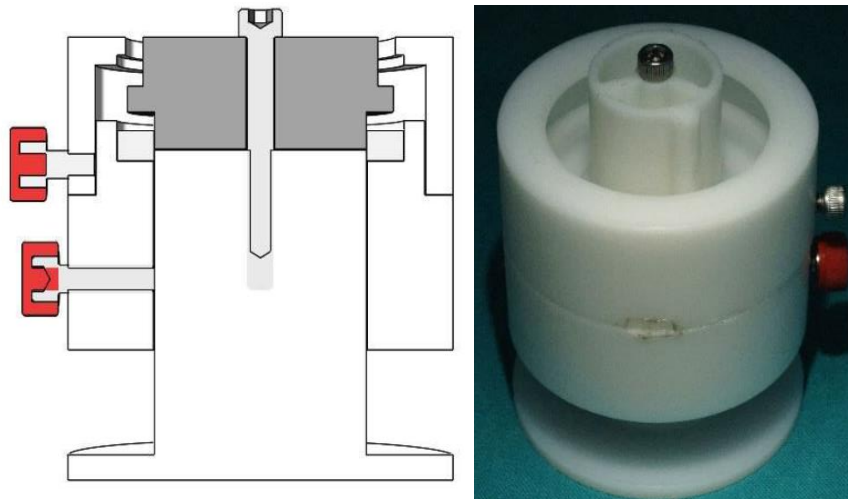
Engineer drawing of moulding jig (left), photograph of moulding jig with custom pedestal in (right)
